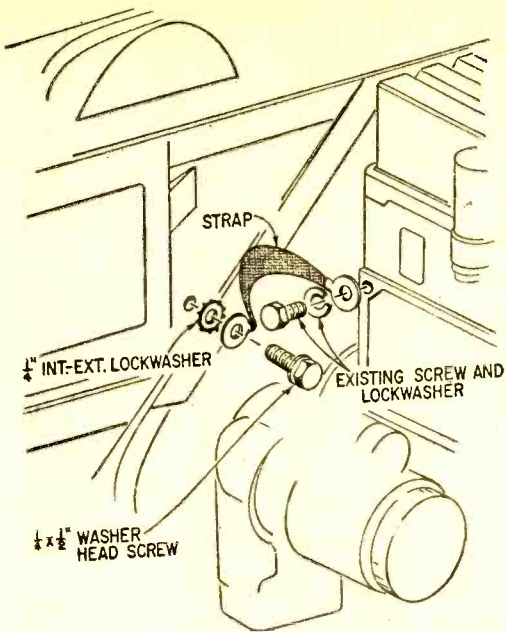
If you have the braid you can custom-make any bonding strap—just solder ends and drill holes.
